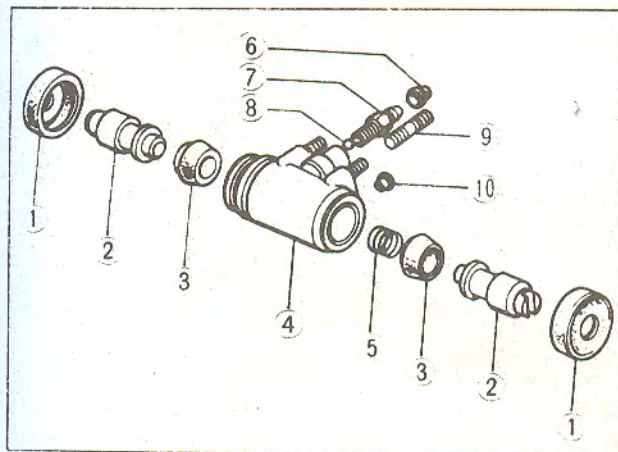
Exploded view of the rear wheel brake cylinder.
